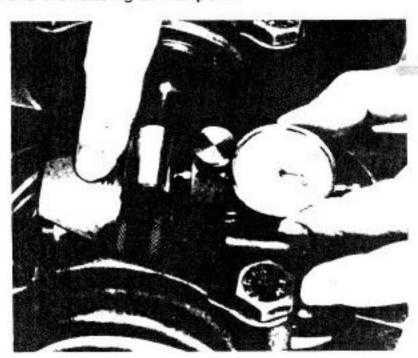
Mandrel and dial gauge measuring pinion position. Gauge pin rests on mandrel while gauge holder is pressed lightly against pinion.
